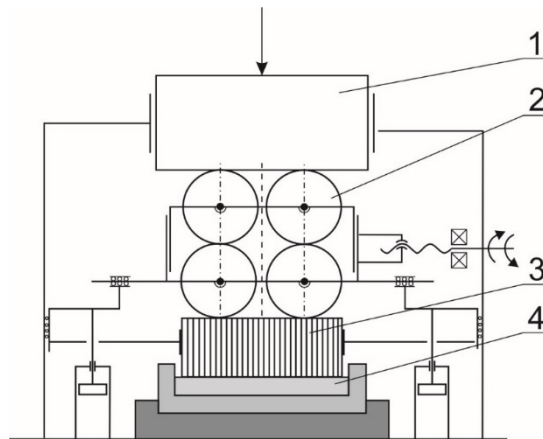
A segmental forming device with reciprocating movement of the working rolls: 1. Press ram, 2. Rolls, 3. Segmental punch, 4. Workpiece
